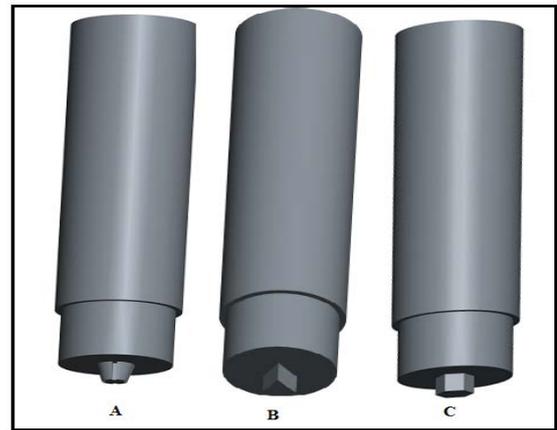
Tool pin geometry- (A) Four Flute (B) Triangular (C) Hexagonal
